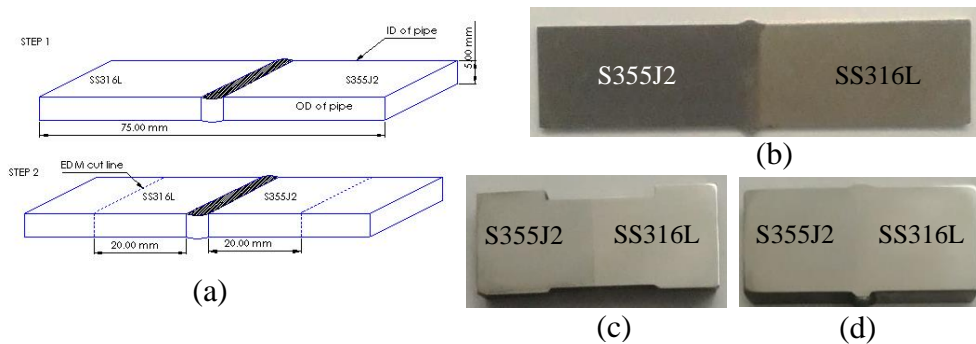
Schematic shows (a) extraction of macrostructure specimen, and images show (b) extracted cut piece of full-length joint, (c) macrostructure specimen for RFW joint, (d) macrostructure specimen of TIG weld joint.
